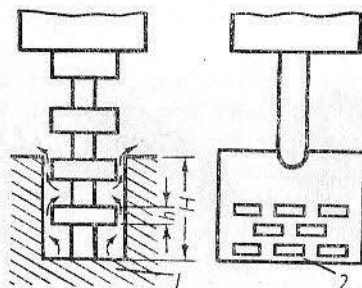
Tool with spaced recesses. 1—cylindrical; 2—flat
